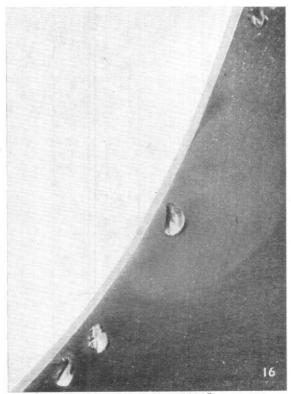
Unacceptable damage on the side of an impeller vane near to its edge; can be rectified at overhaul.
